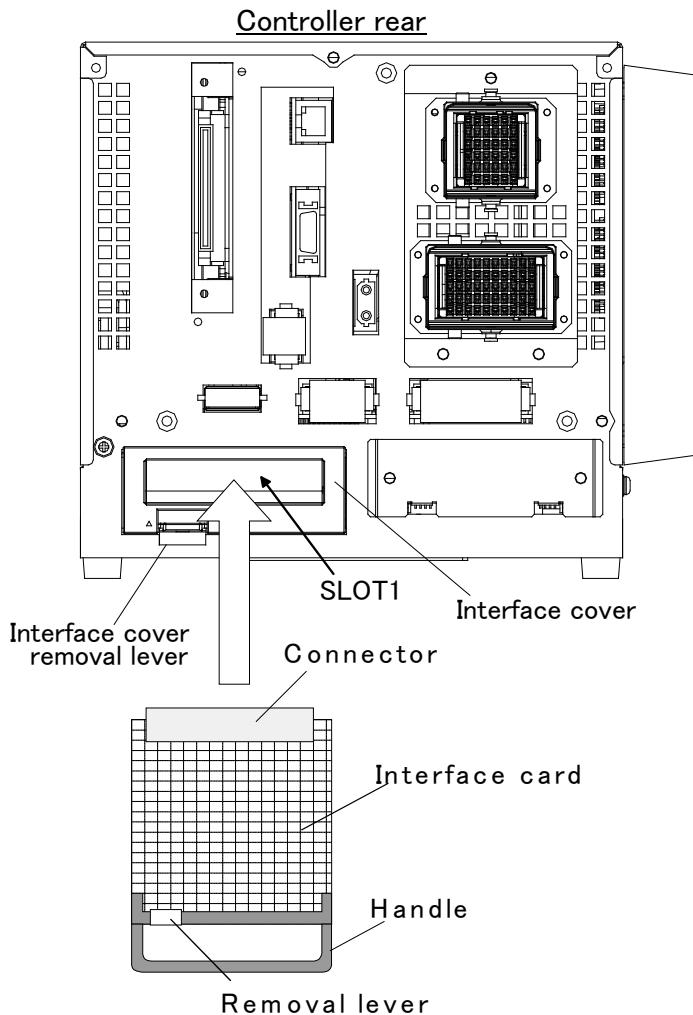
Mounting of the 2D-TZ535 card (CR1D controller)
